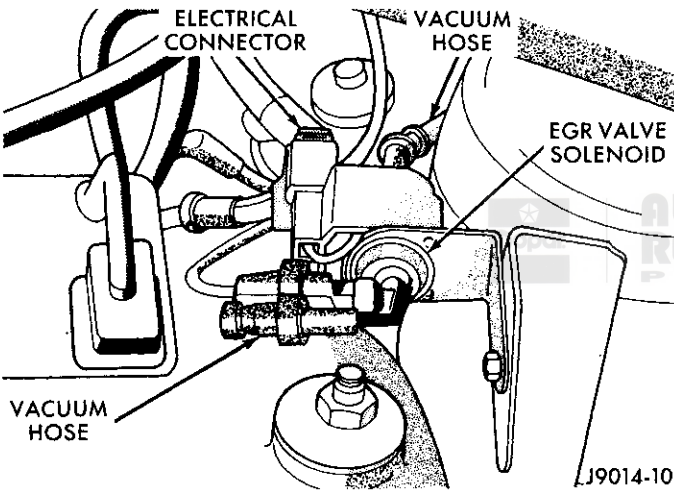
EGR Valve Vacuum Solenoid—MJ/XJ Vehicles Only
